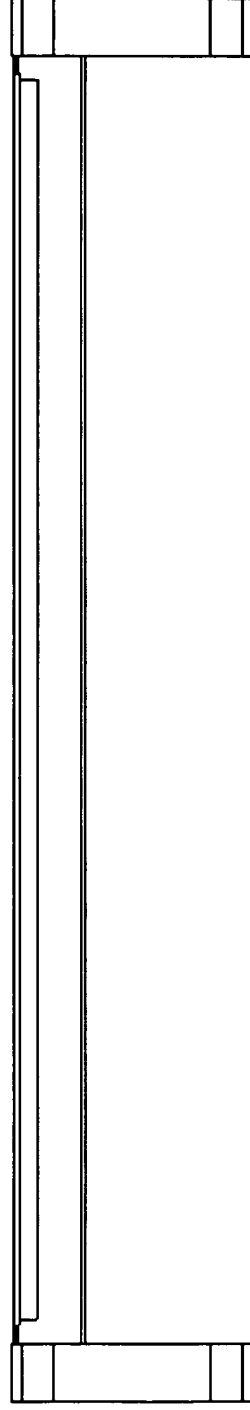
D: Right view of a ceiling frame (20 foot high cube collapsible cargo container)
